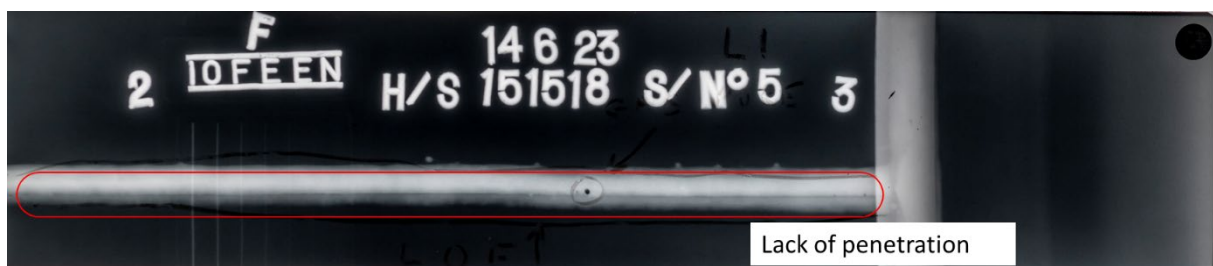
Radiograph of longitudinal weld in a pressure vessel. Lack of penetration in the weld is highlighted in red.
